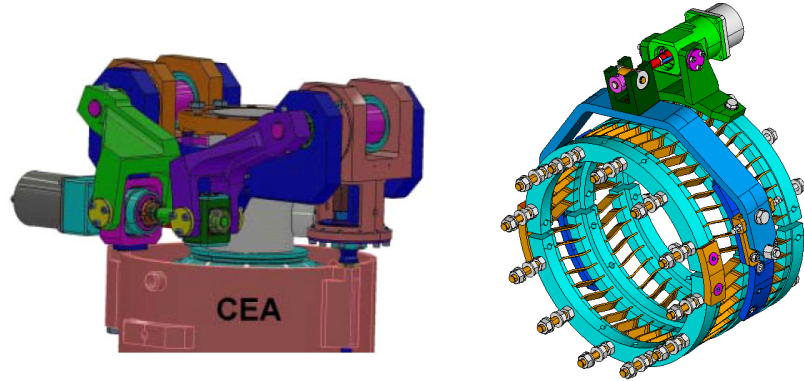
CEA Saclay tuner and blade-type tuner assemblies (courtesy TESLA/TTF collaboration)
